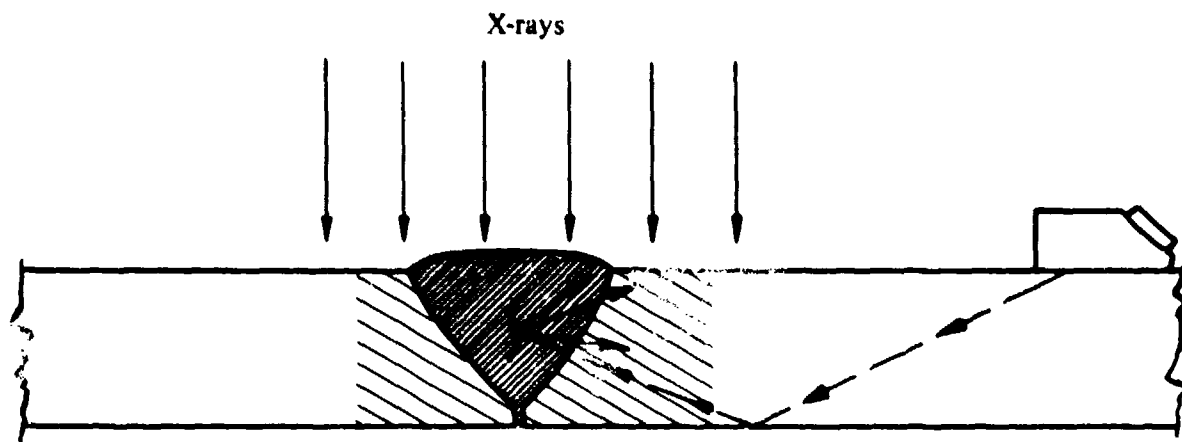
(a) A crack in the weld metal easily detected by X-rays
